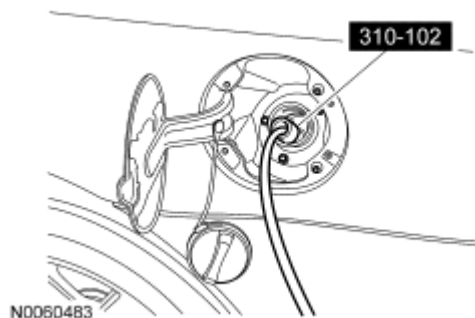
Inserting Special Tool (310-102) Into Fuel Tank Filler Pipe
